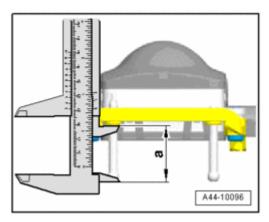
Identifying Dimension Of Studs Courtesy of VOLKSWAGEN UNITED STATES, INC.
